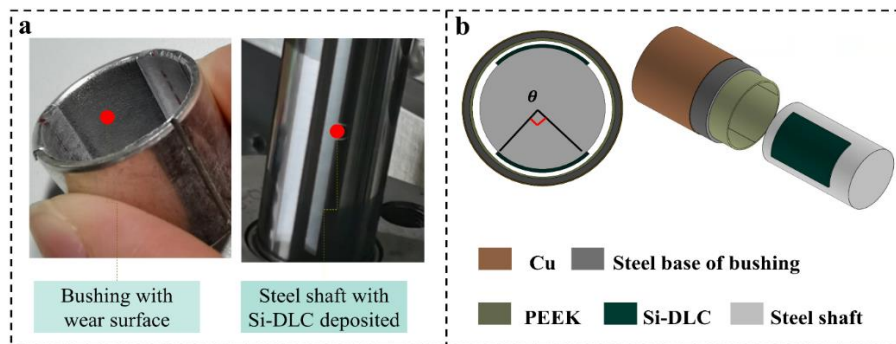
(a) Worn bearing and steel shaft coated with Si-DLC film and (b) detailed structure components.
